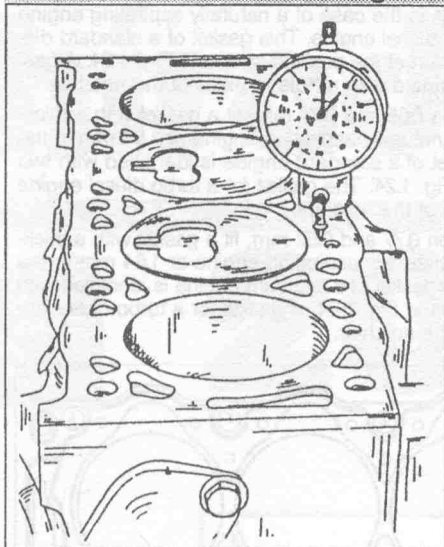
Measuring the protrusion of the piston above the cylinder block face. The stylus is placed onto the surface and set to "zero"
